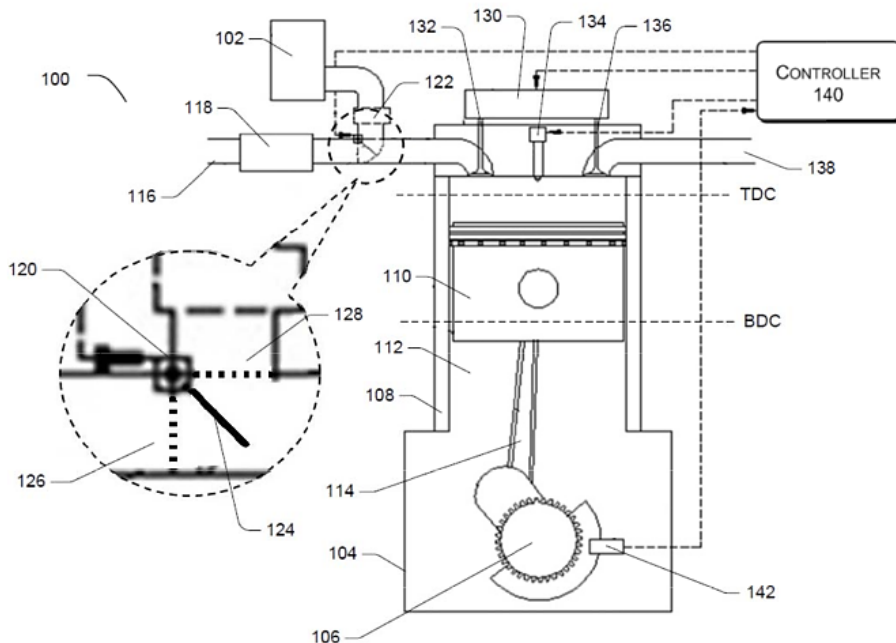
illustrates a four stroke internal combustion (IC) engine equipped with a collection chamber.
